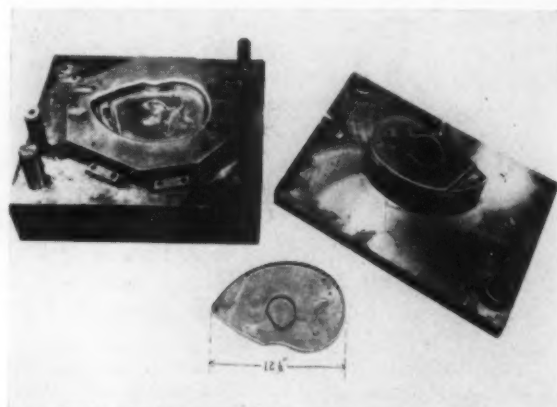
A die made of Air-Wear which formed over 50,000 lawn mower side frames without redressing.
